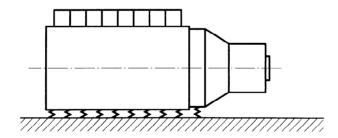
Assembly with flange housing and resilient mounting of the engine
